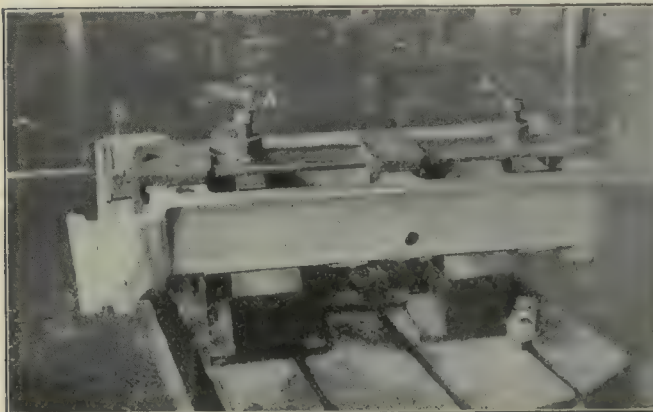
DRILLING HOLES FOR CRANKSHAFT BEARINGS IN THE CRANK CASE
